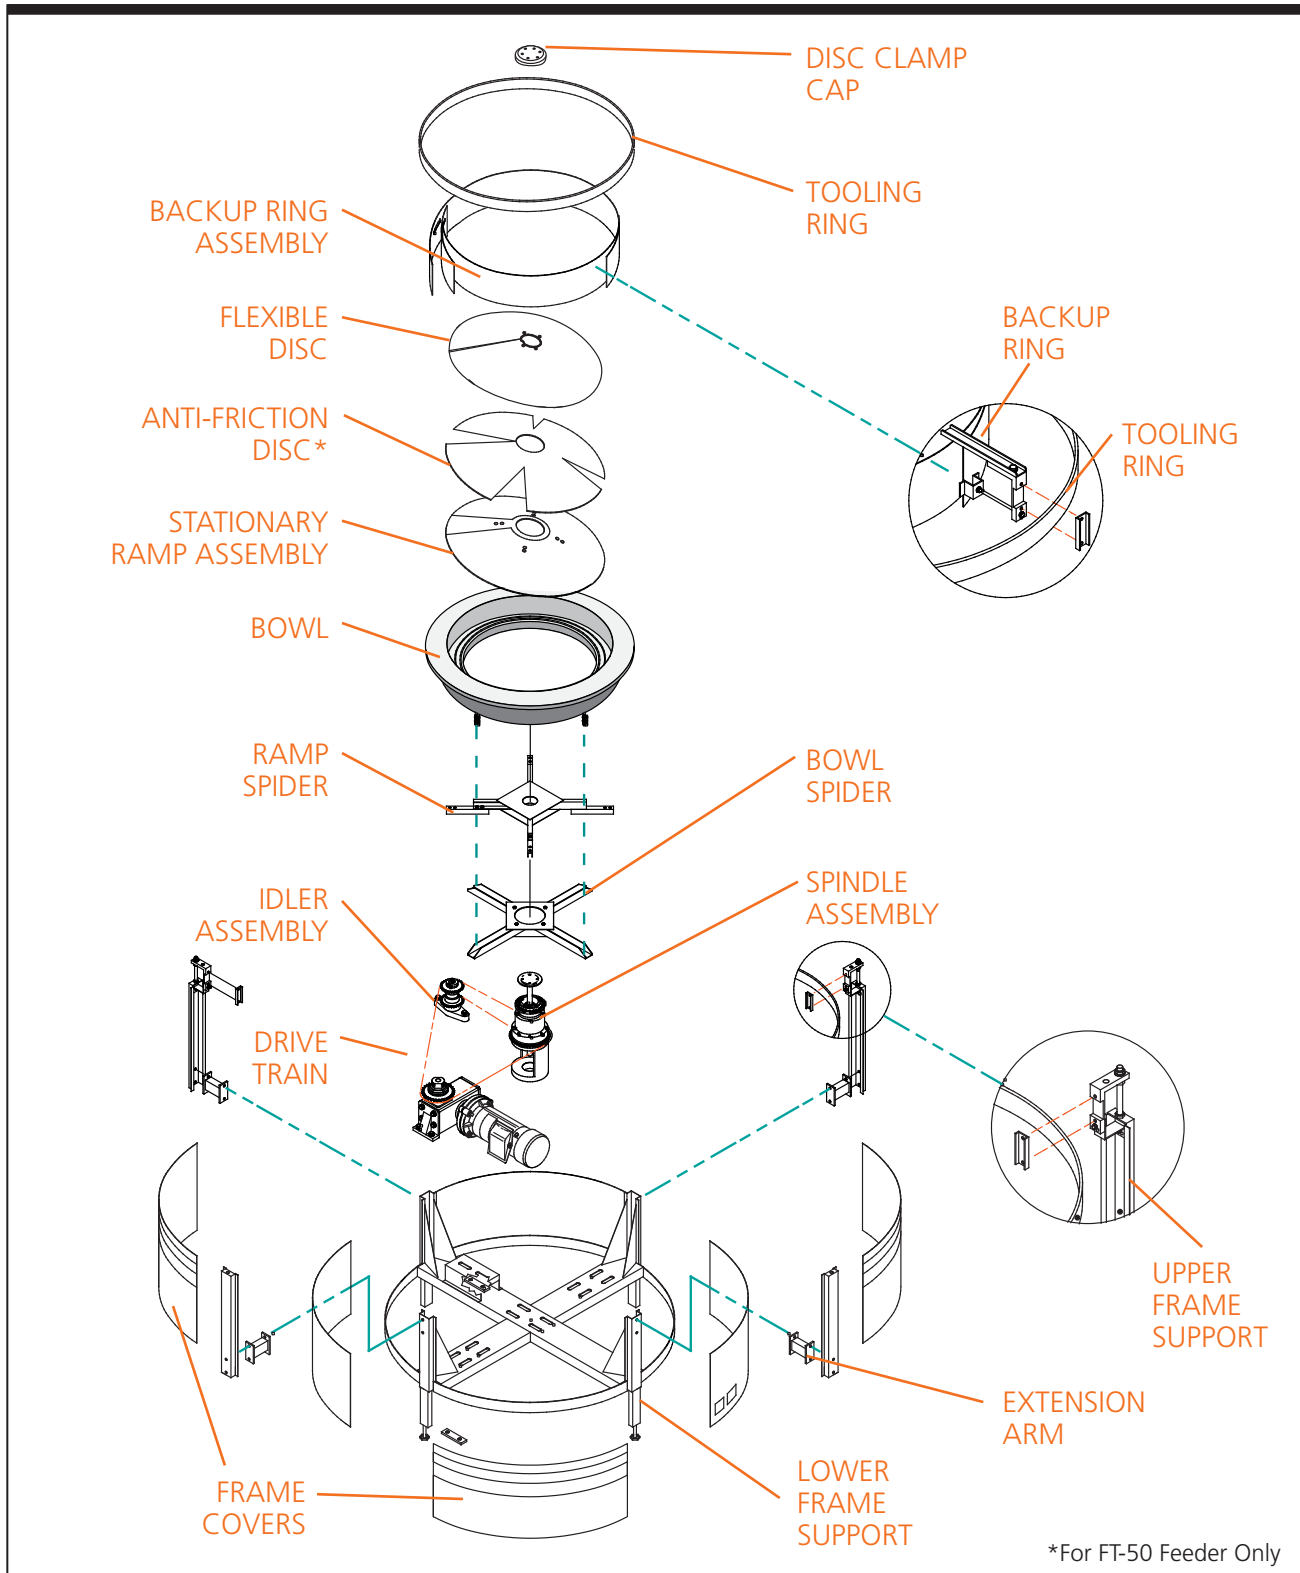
Typical FT-Series Dual Drive Feeder - Exploded View
